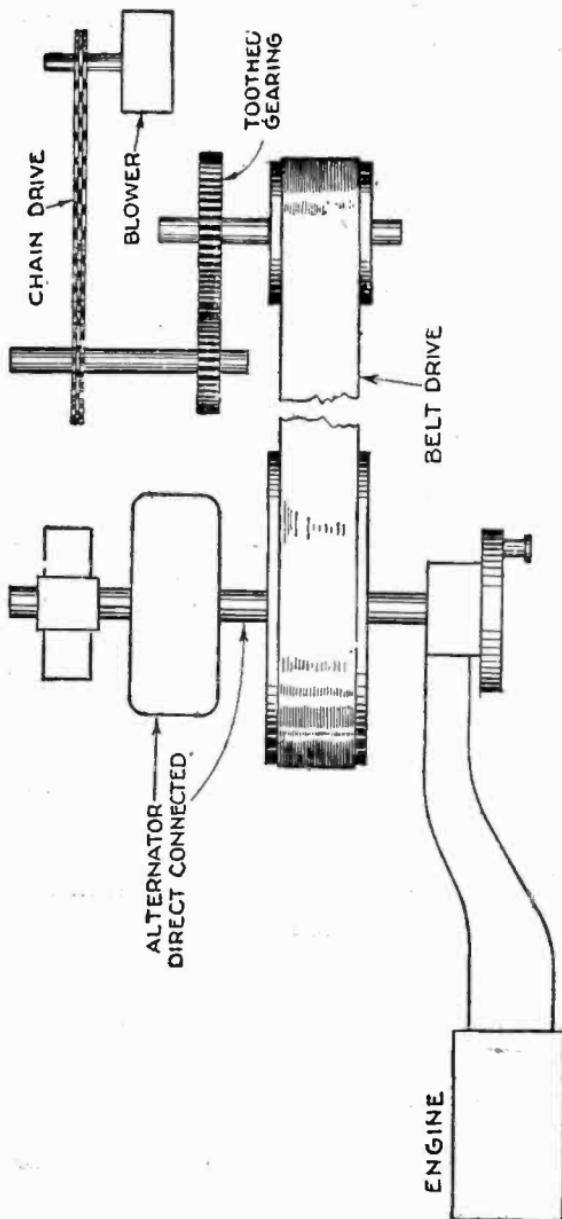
,945.—Installation with various kinds of drive gear showing that the power may be transmitted from the engine to the machine or machines to be driven by: 1, belt; 2, toothed gearing; 3, chain; 4, direct connected.
